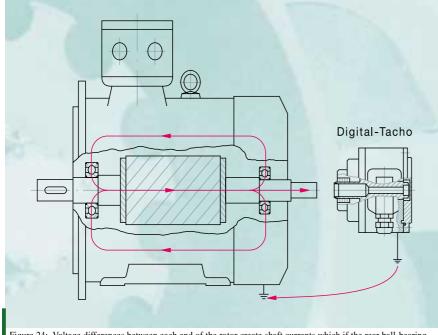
Voltage differences between each end of the rotor create shaft currents which if the rear ball-bearing is insulated, endanger the built-on components.
